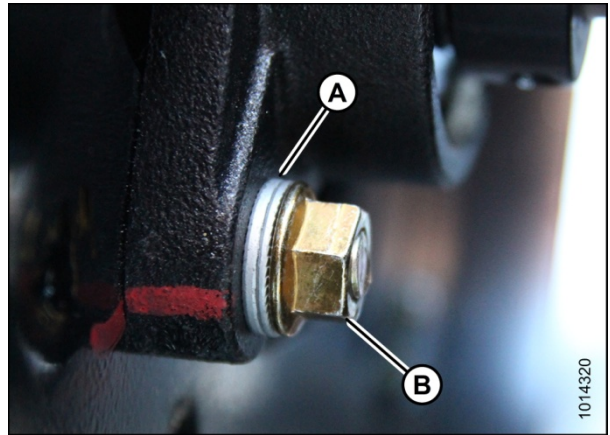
Right Auger Bearing: Nordlock Washer Installed
